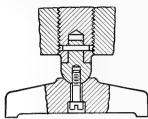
This is another adaptation of the methods used in Figs. 177–179. A ball end is pinned fast in the retaining screw, which acts like a swivel for the clamping shoe, the latter being held in place by a small fillister head screw in an oversize hole. The swiveling permits the shoe to accommodate itself to rough or uneven surfaces.
